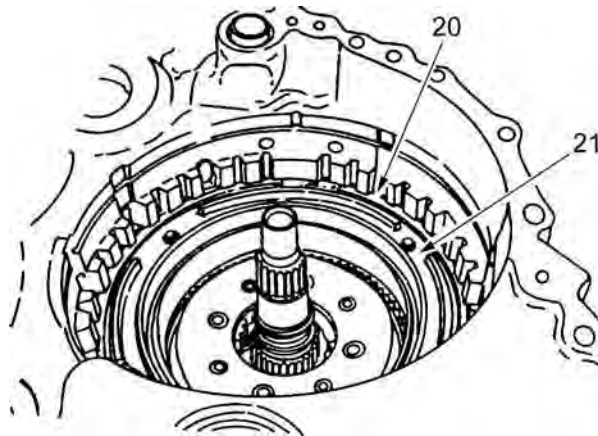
Third Clutch Piston Housing Assembly and Retaining Ring Removal.
